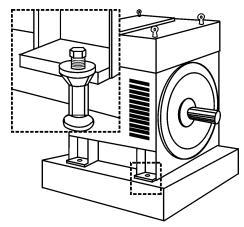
Motor mounted on a concrete base with foundation studs
